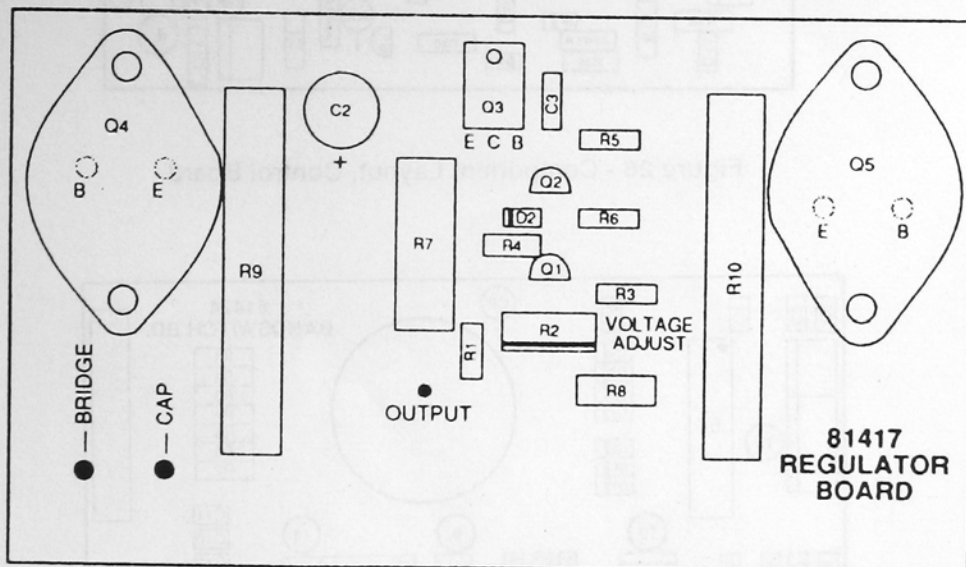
Component Layout, KC500-PS Power Supply Regulator Board
